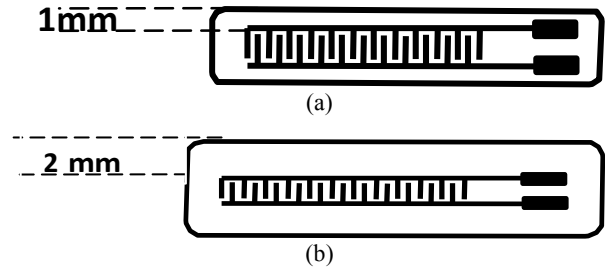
PCB Test Board structures. (a) with a narrow edge, (b) with a wide edge.
